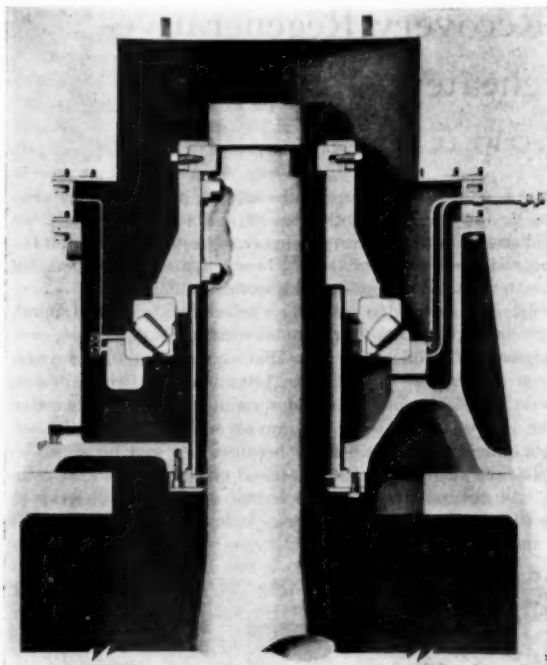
TYPICAL ROTOR SUPPORT OF CURRENT DESIGN EMPLOYING SPHERANGULAR ROLLER THRUST BEARING
